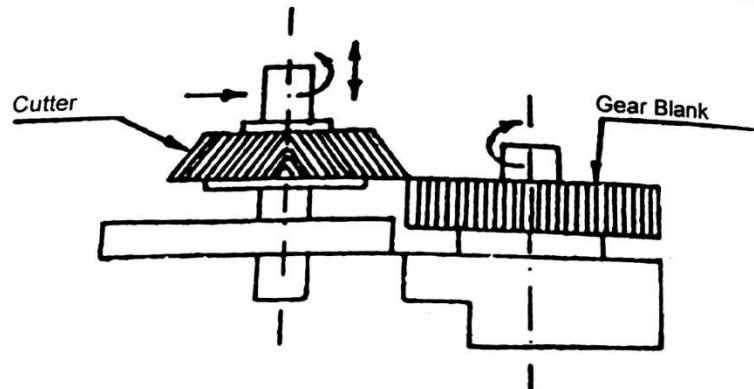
(b) Setup of Shaper Cutter Gear Generating Process
